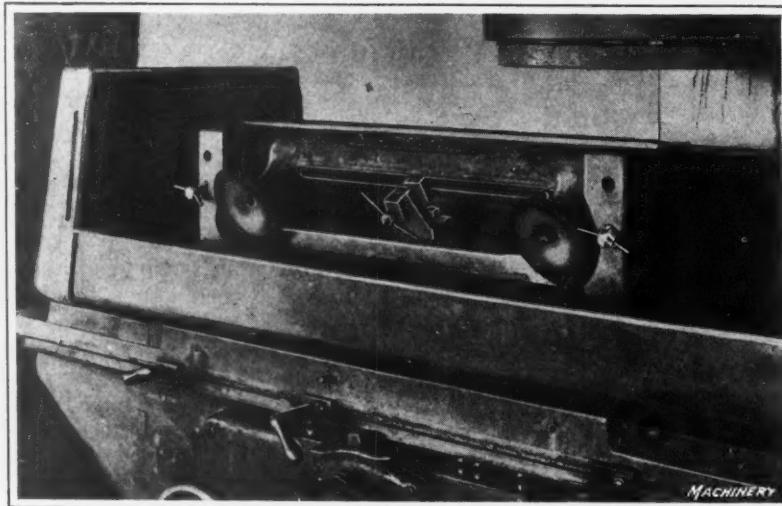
Grinding the Angular Surface of the Lathe Bed on a Vertical Surface Grinder
